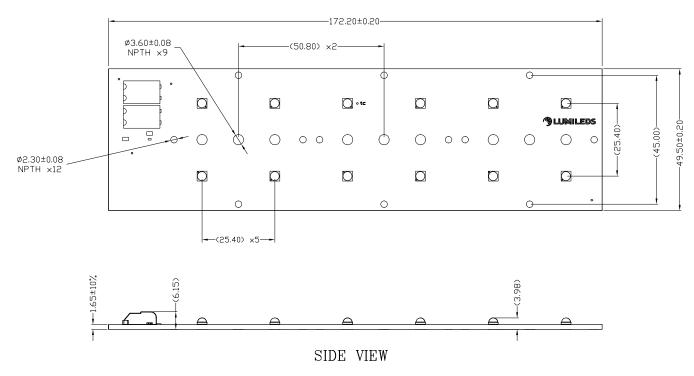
Mechanical dimensions for L213-xxxx012MDE001.
